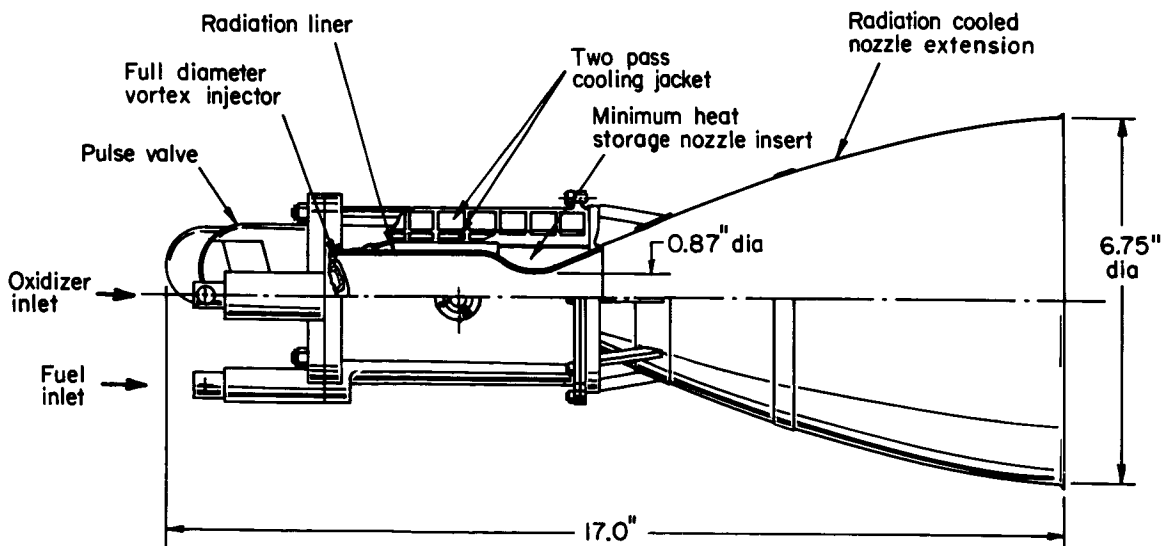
C-1 thrust chamber assembly.
